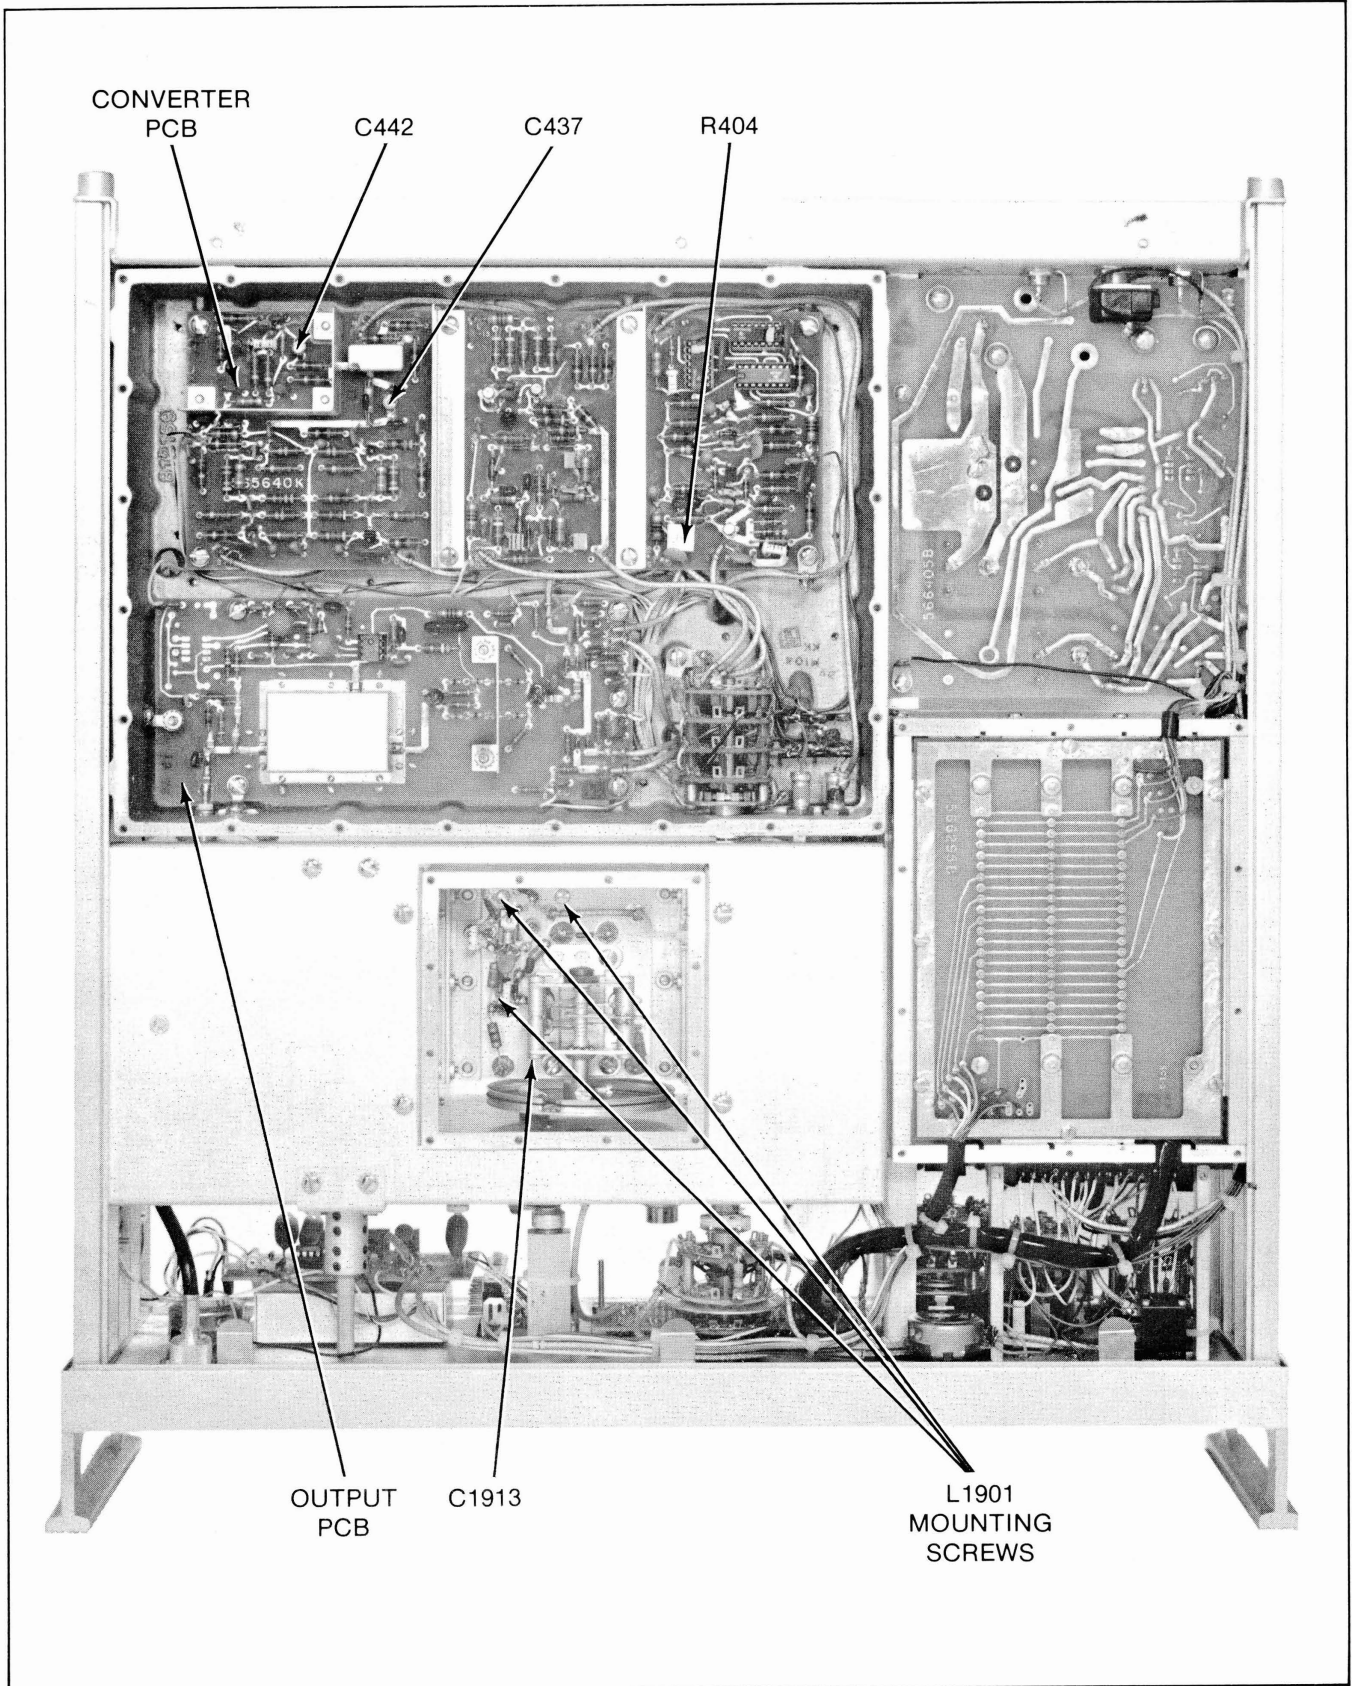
Model 102D, Bottom View with Cover Shields Removed
